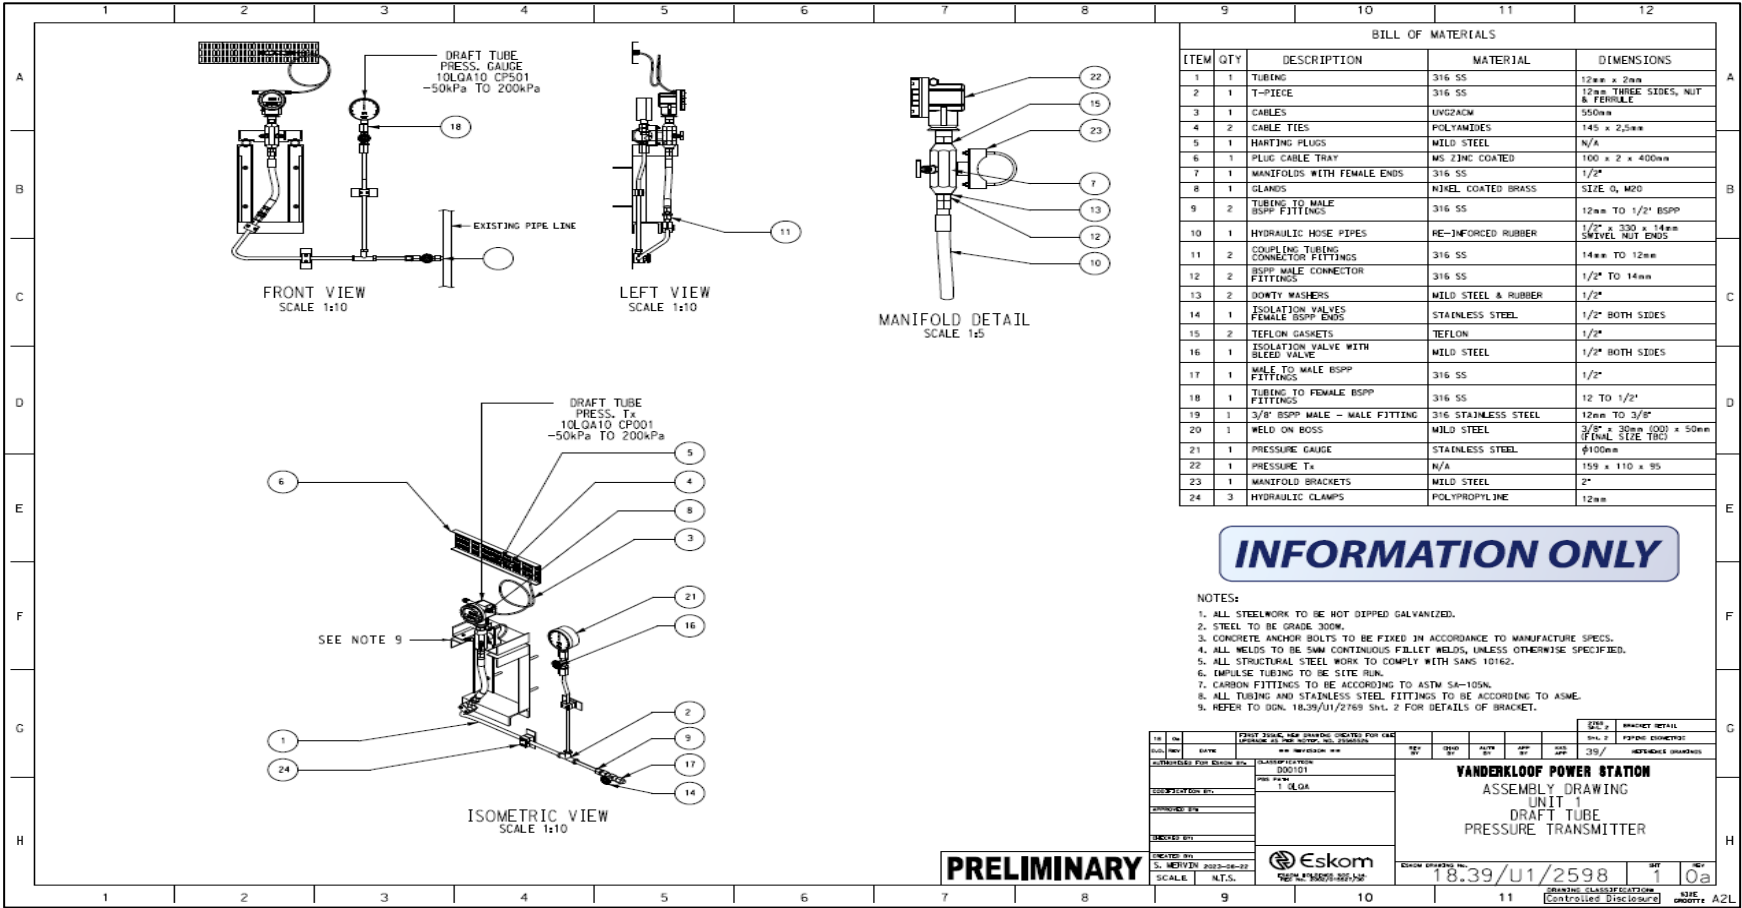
Assembly Drawing Single Pressure Transmitter and Gauge
